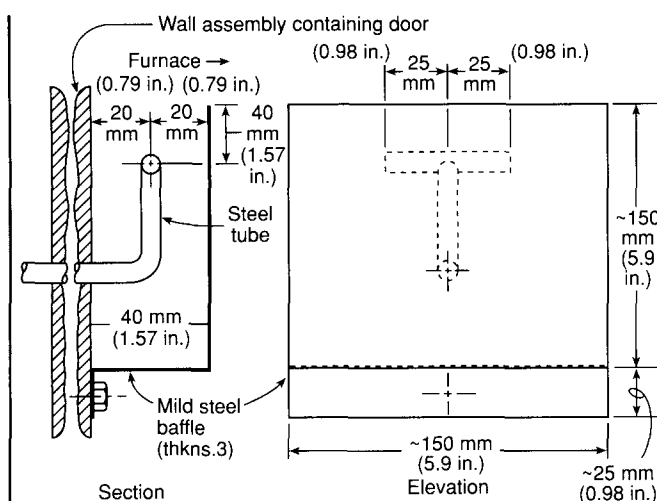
(a) Static pressure-measuring device dimensions.
